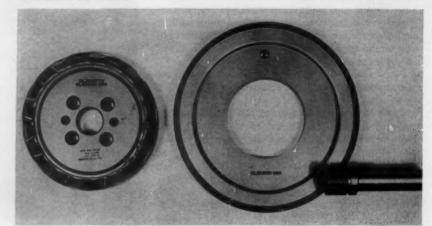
Relative cutter sizes for gear and pinion of 1:360 combination. Gear OD is 7.00-in., pinion OD is 1.06-in., and pitch is 51.4.
